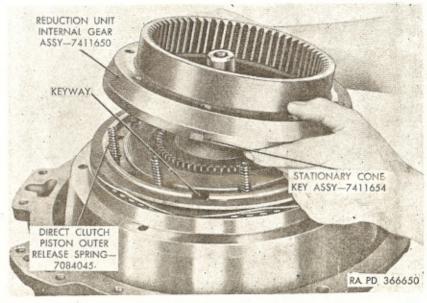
Removing or installing reduction unit internal gear assembly (303M).
